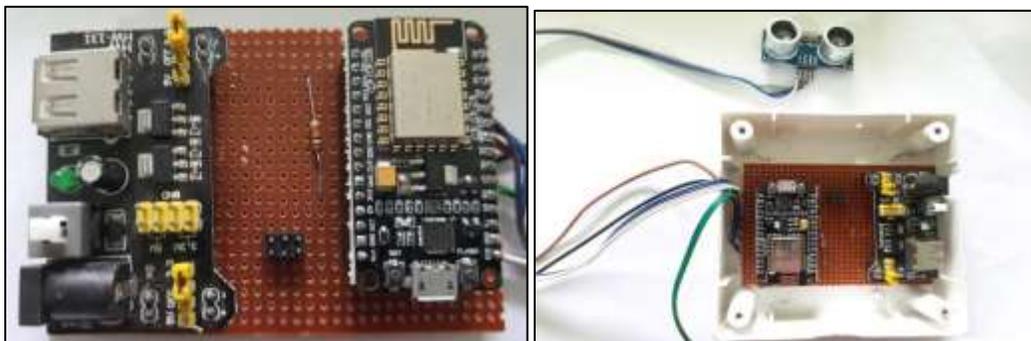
a. Soldered circuit in a perf board Fig.3.2. b. Final Assembly
